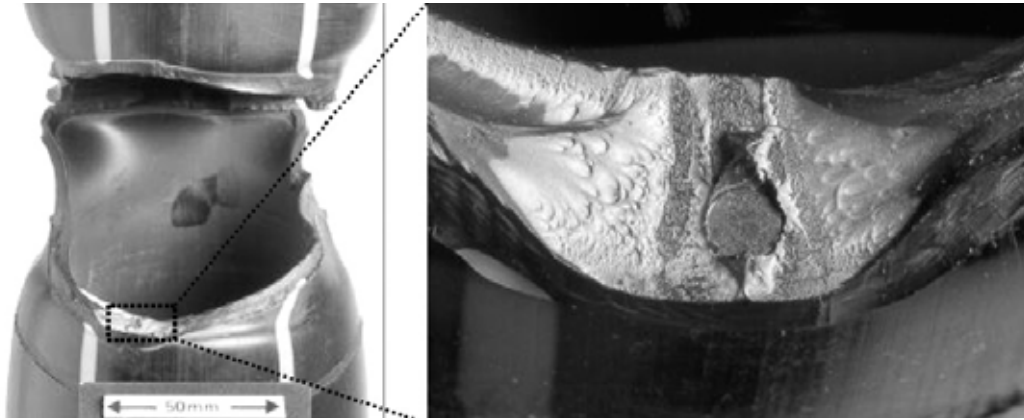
Photographs of a failed weld in 125mm pipe containing 4mm diameter planar flaw (Troughton, 2001).
